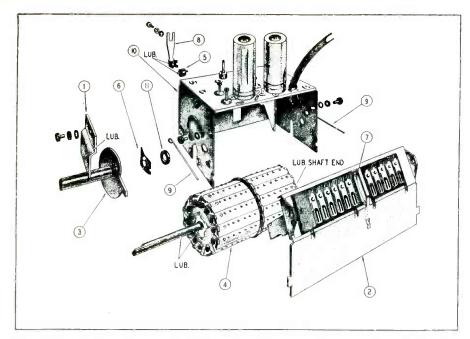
Exploded view of Philco 12-position turret tuner. Item 8 in this figure is the detent roller pressure spring. The roller itself is shown as Item 5.
